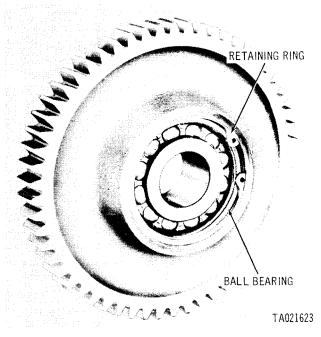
Removing generator idler gear retaining ring and ball bearing.
